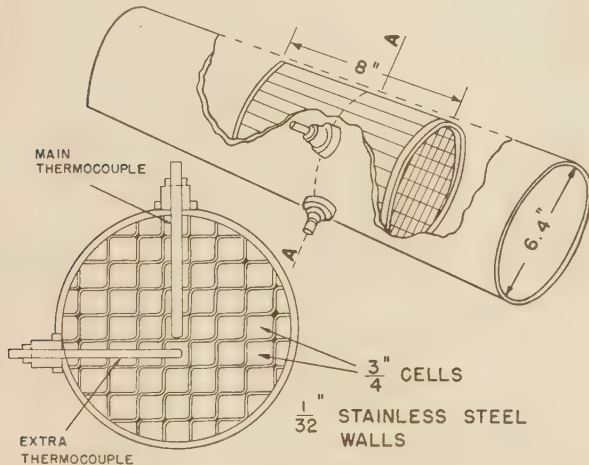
"HONEYCOMB" TYPE THERMOCOUPLE-SHIELD ASSEMBLY
